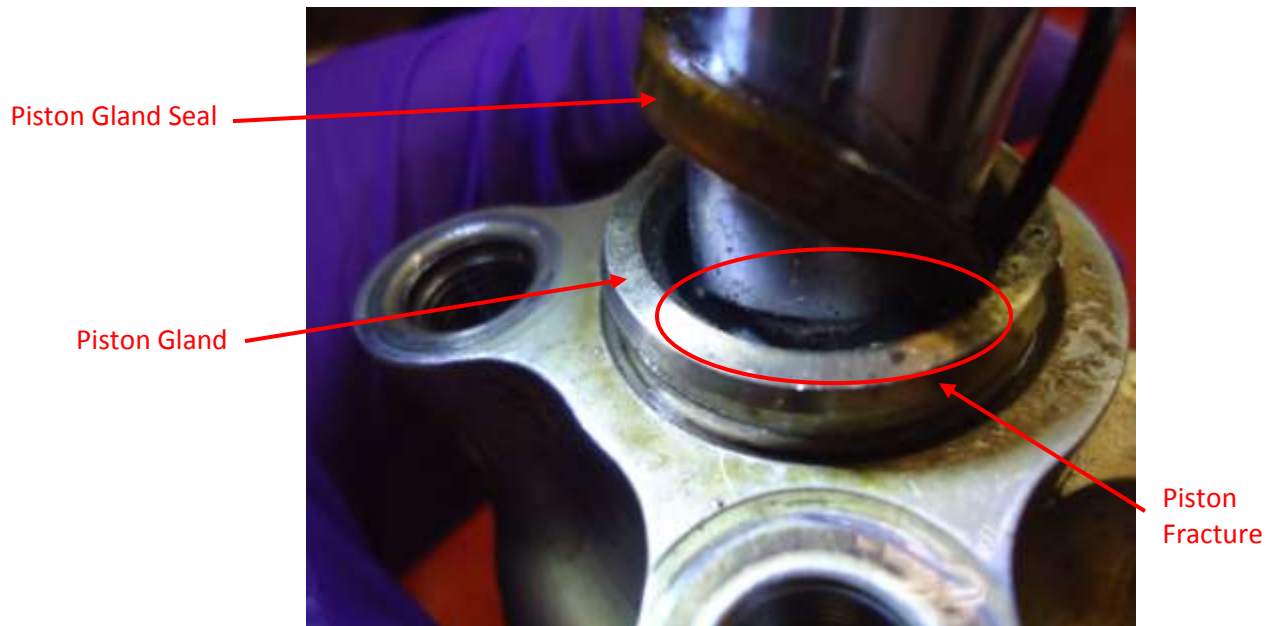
Fractured and bent piston. Gland seals extruding from piston gland.
